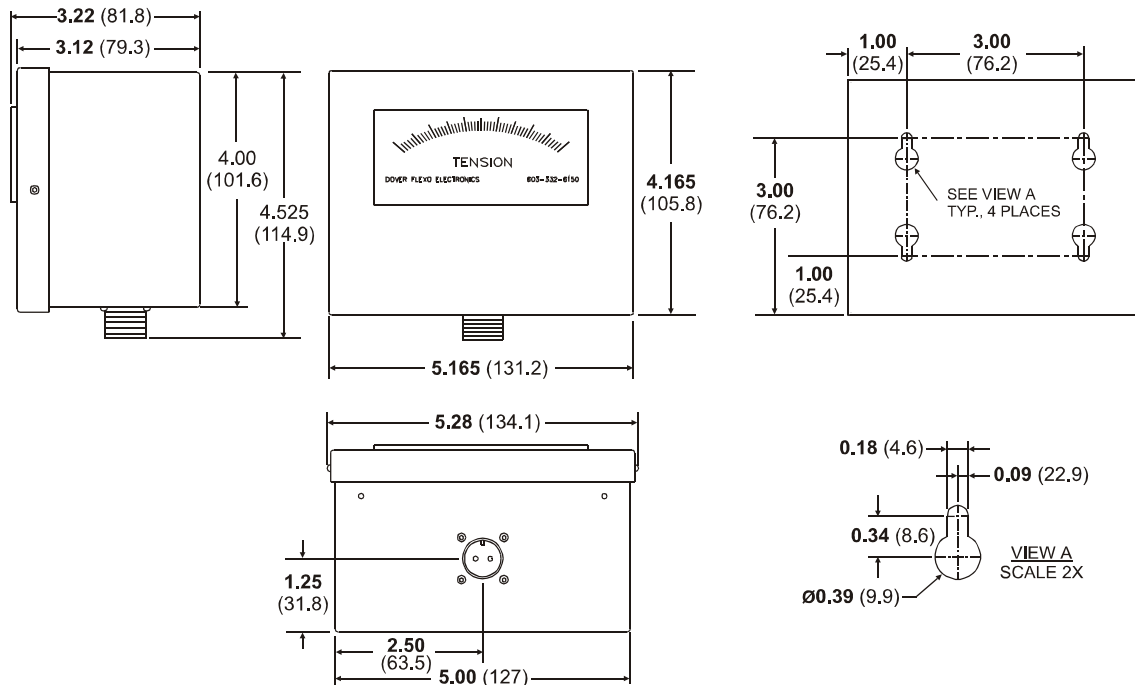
OPTIONAL TENSION METER ENCLOSURE DIMENSIONS
